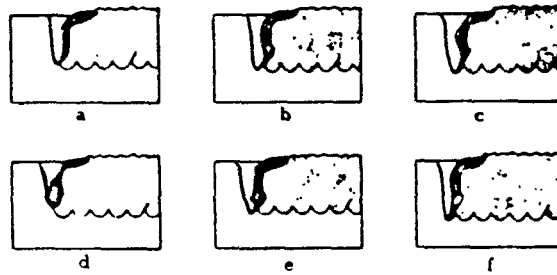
SPIKING MECHANISM IN ELECTRON BEAM WELDING [46]
